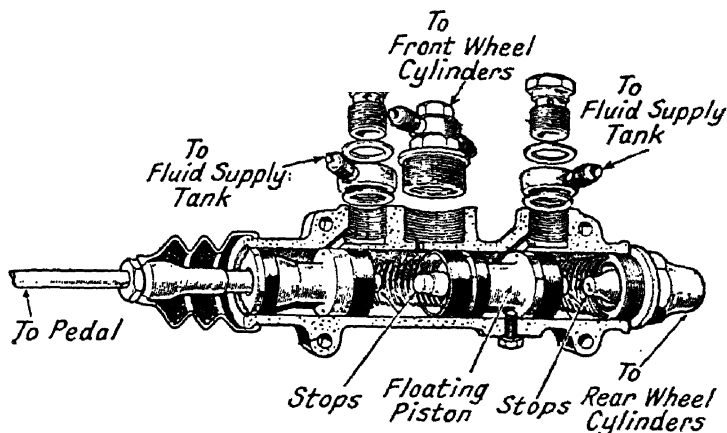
Lockheed Tandem Master Cylinder Unit.
